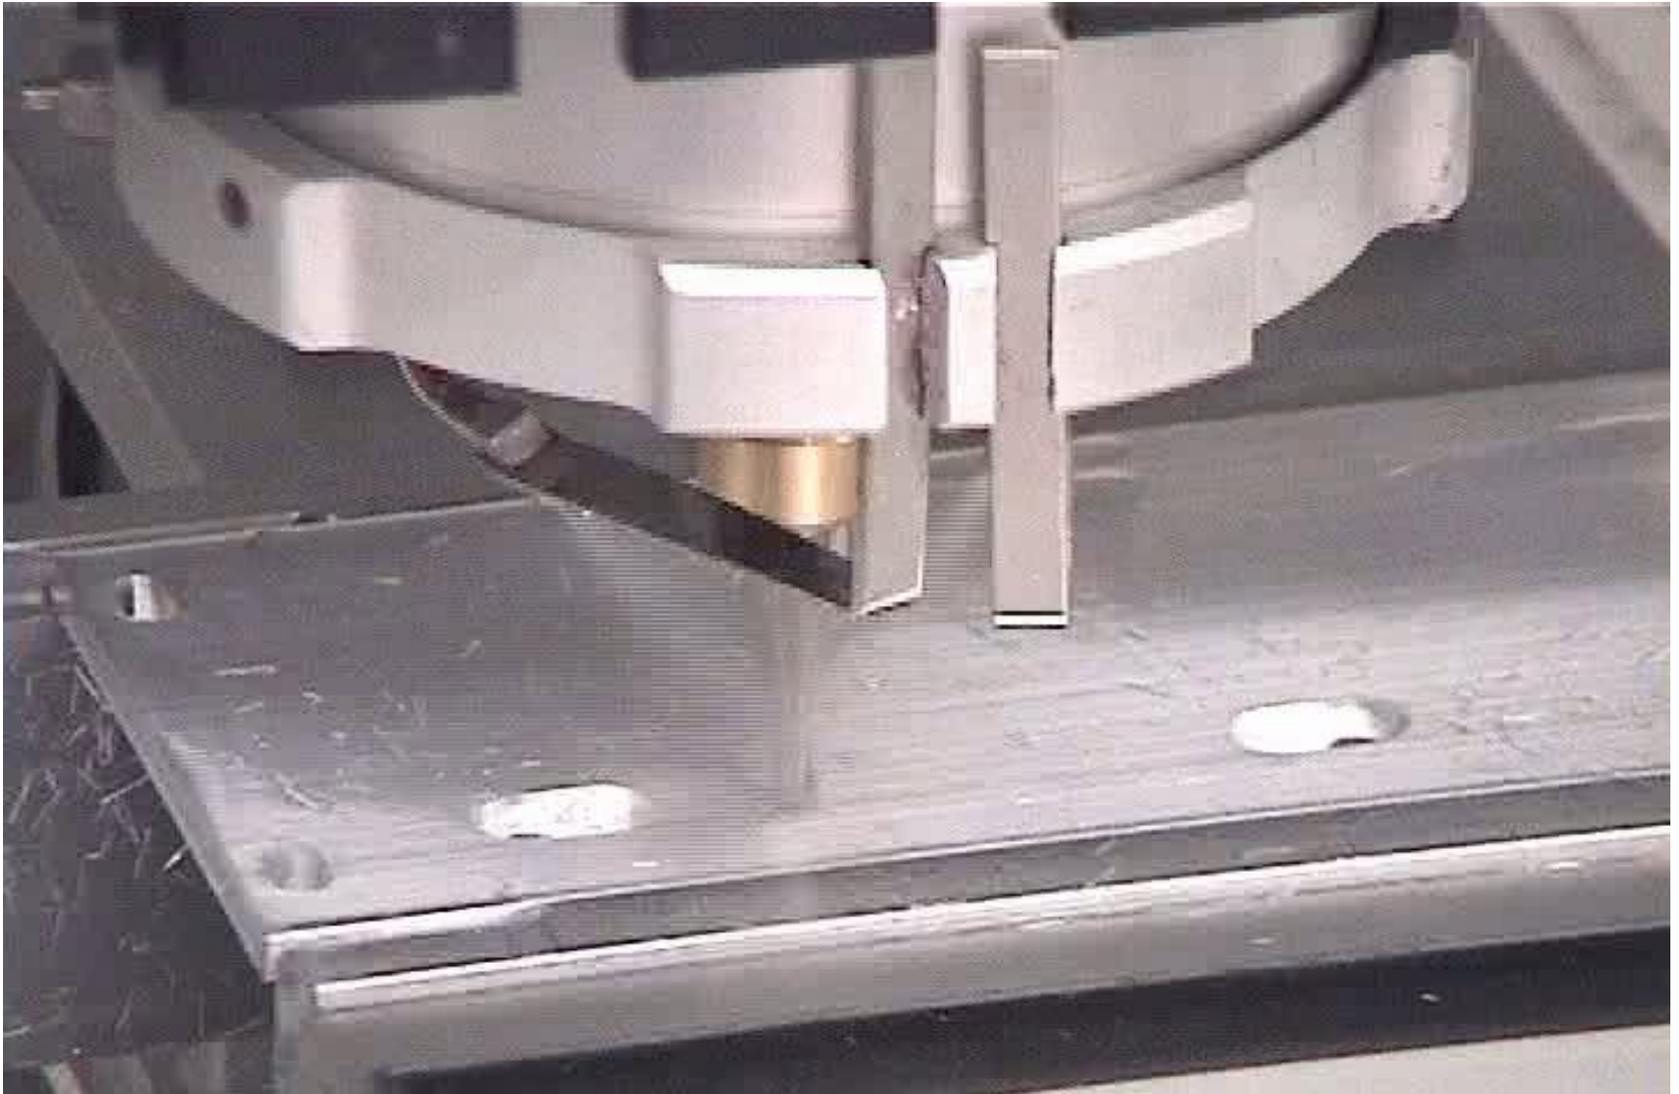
Integrated product and process design allows this aerospace component to be completely machined from the solid as shown in the lower photograph (Courtesy of Dr. Donald Sandstrom, The Boeing Company)
